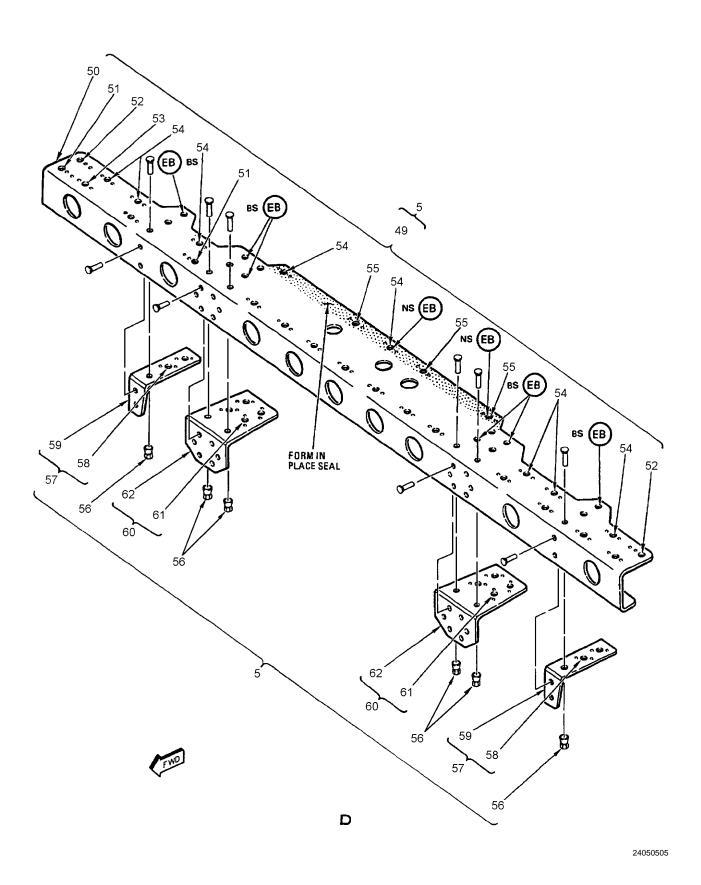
Upper and Lower Support Assemblies (Sheet 5)
